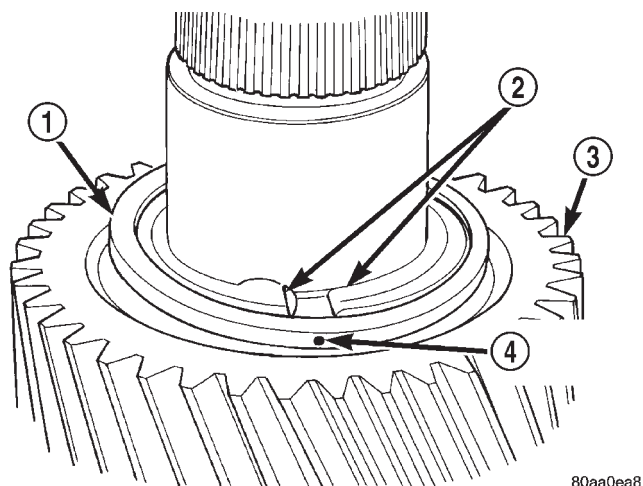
Starting Retaining Ring Over Two-Piece Thrust Washer
